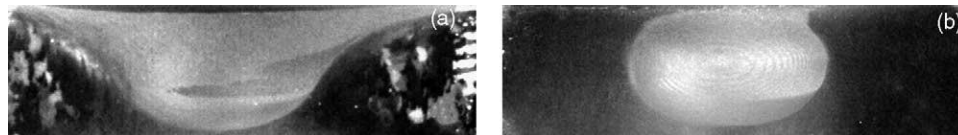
“Impact of RS and TS on nugget shape: (a) 300 rpm, 51 mm/min and (b) 900 rpm, 203 mm/min (standard threaded pin)(FSPA356)” [1]
